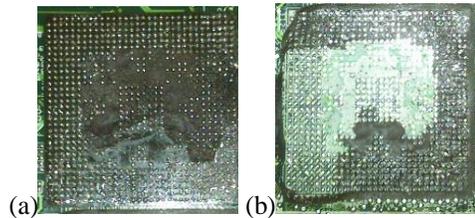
Typical cut from a home produced BGA/Stencil/PCB interconnect showing cross-sections covered with the stencil on the BGA side (a) and on the PCB side (b).
